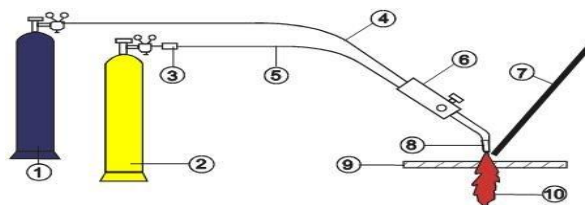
How to install welding components. (1). Oxygen cylinder with pressure reducing valve; (2). Acetylene cylinder with pressure reducing valve; (3). Pre-regulating device; (4). Oxygen hose; (5). Acetylene hose; (6). Welding torch; (7). Welding rod; (8). Welding rod; (9). Welding parts and (10). Welding flame.
